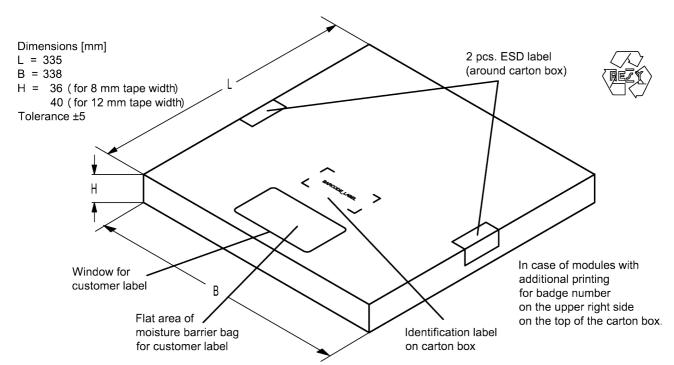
Drawing of folding box for reel with diameter of 330 mm.
